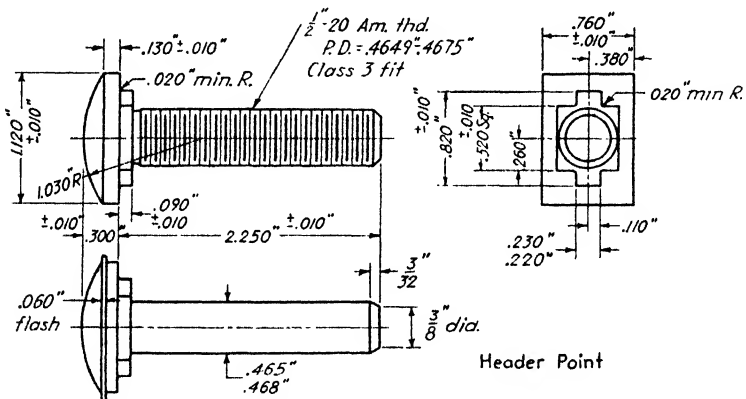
Fairly typical cold-headed part except that head is oblong and has an odd shape of boss under it. The rolled thread meets class 3 specifications. Lower view shows part as headed, with point, and before flash has been removed.
